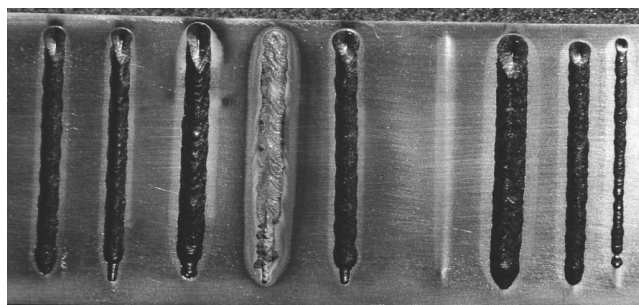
A view of bead-on-plate welds on titanium alloy Ti6Al4V sheet 2.0 mm thick laser welded with the TRUMPF TruDISK 3302 (Table 6)
